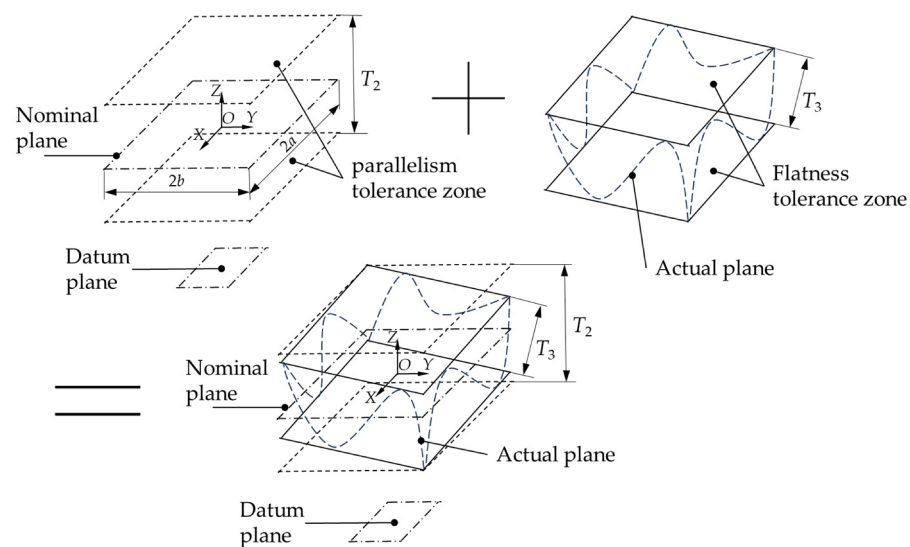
Tolerance coupling of flatness and parallelism.
